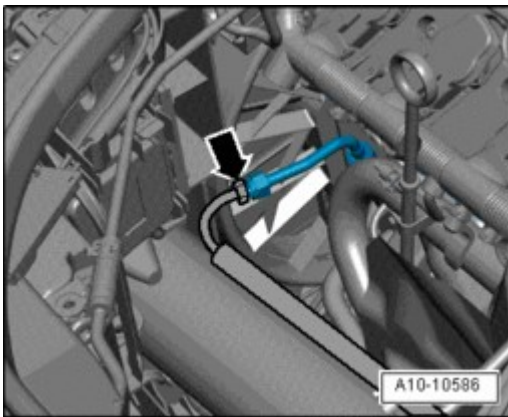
Extracting Hydraulic Oil From Power Steering Reservoir Using Used Oil Collecting And Extracting Device V.A.G 1782
